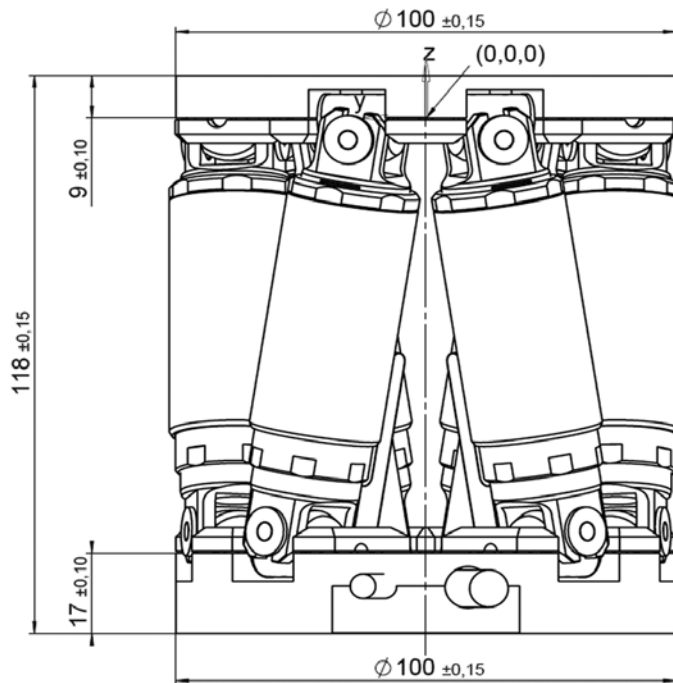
H-810.00 miniature Hexapod, front view (dimensions in mm)
